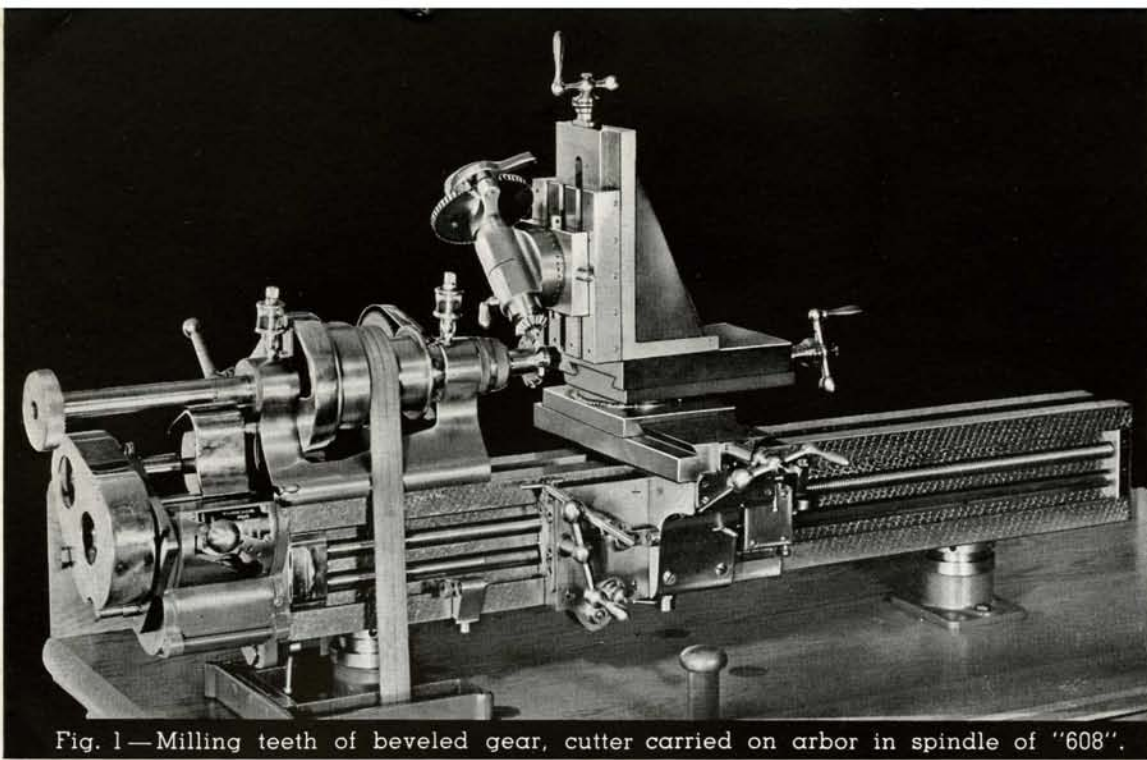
Milling teeth of beveled gear, cutter carried on arbor in spindle of "608".
